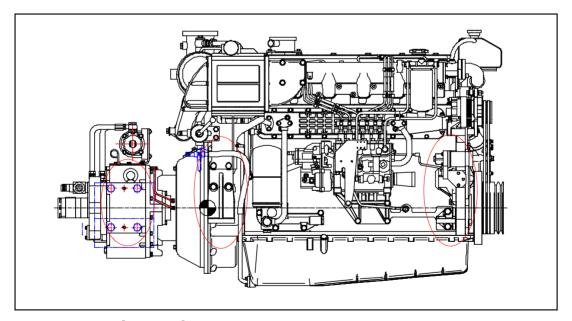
FLYWHEEL CONCENTRICITY CHECKING
